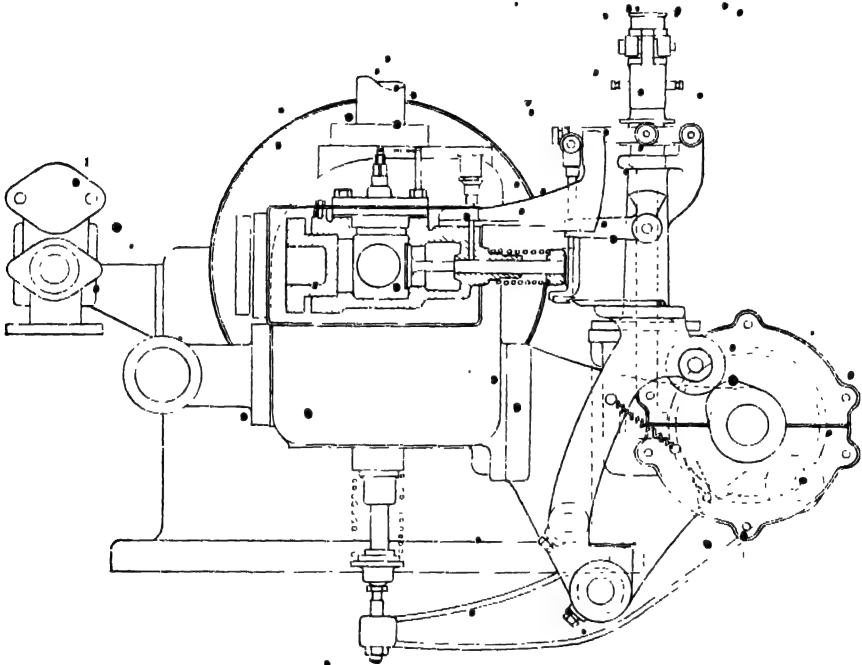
Gardner Engine. Fuel Feed and Governor Mechanism
